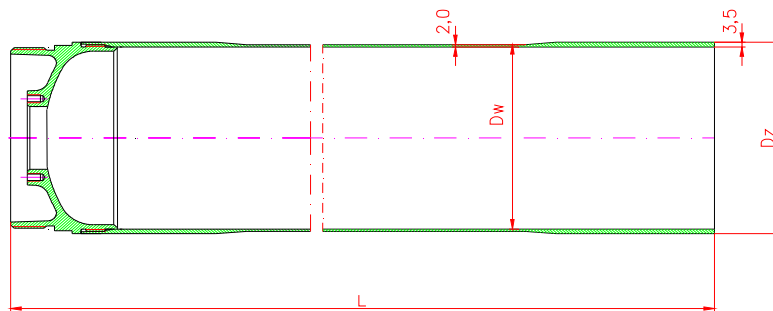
A 227 mm caliber body with a welded bottom
